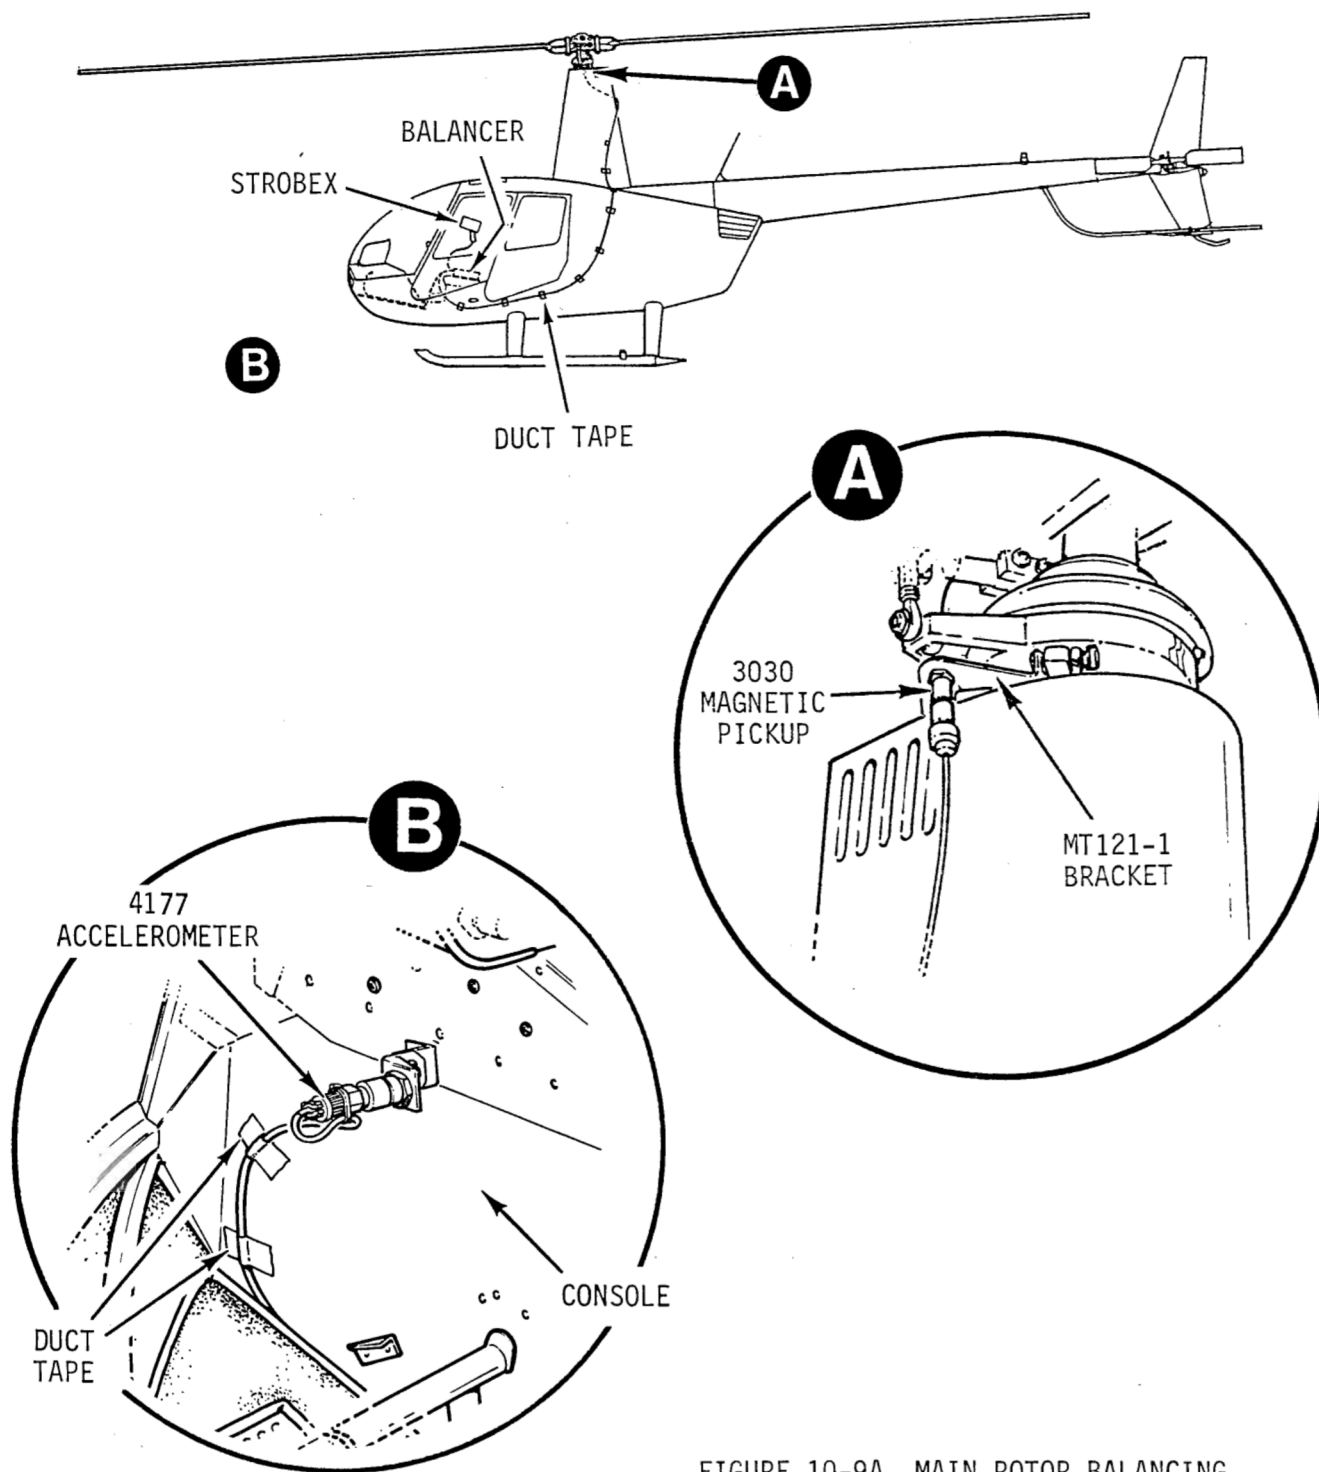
A MAIN ROTOR BALANCING EQUIPMENT INSTALLATION
